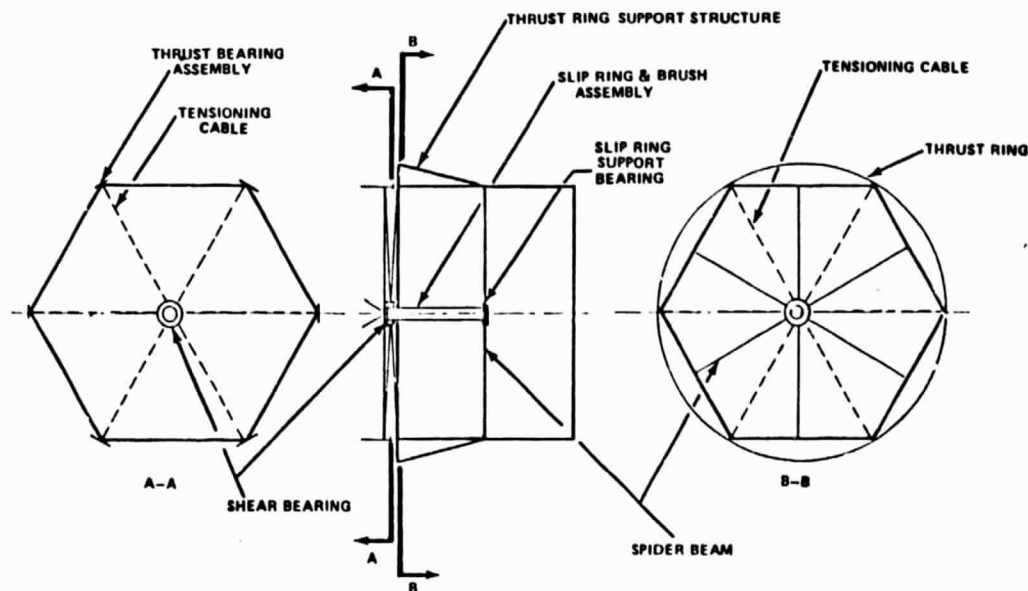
SPS Rotary Joint Concept to Accommodate Small Ring and Brush Assembly
